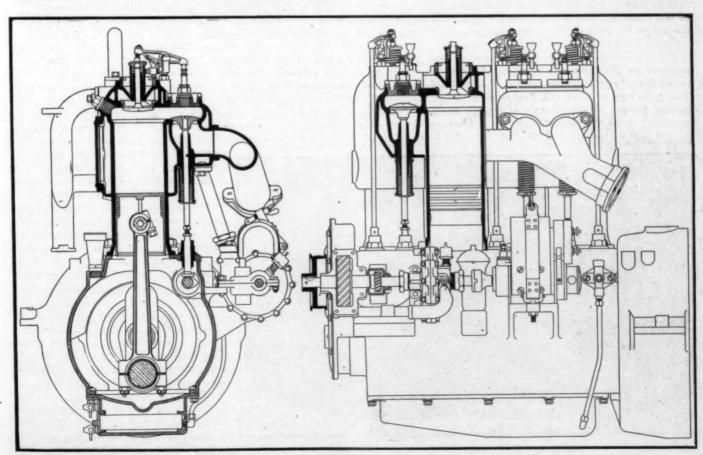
Transverse section and part longitudinal section through the Bergdoll motor
